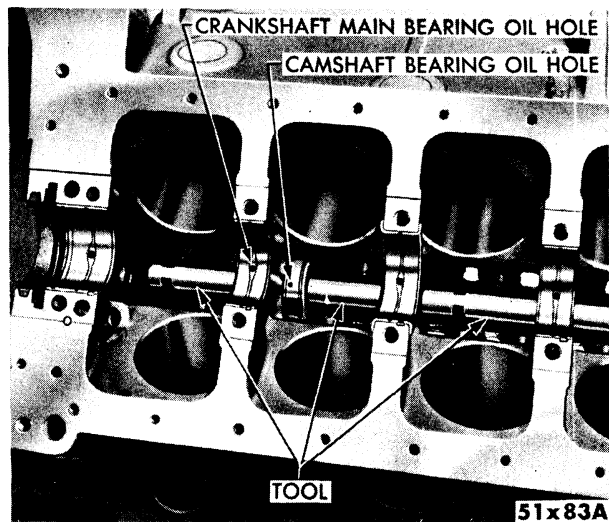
Installing Camshaft Bearing Shells Using Tool C-3034
